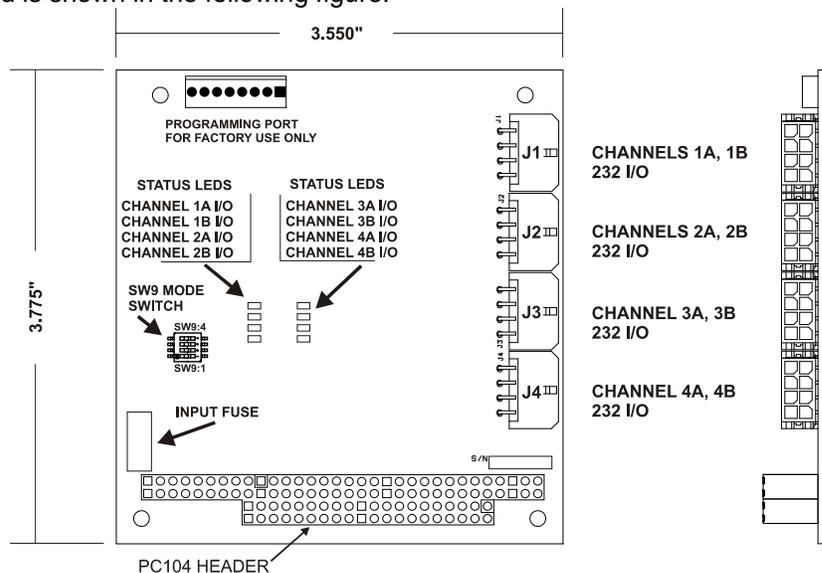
907-232 (8-Channel RS-232) card
